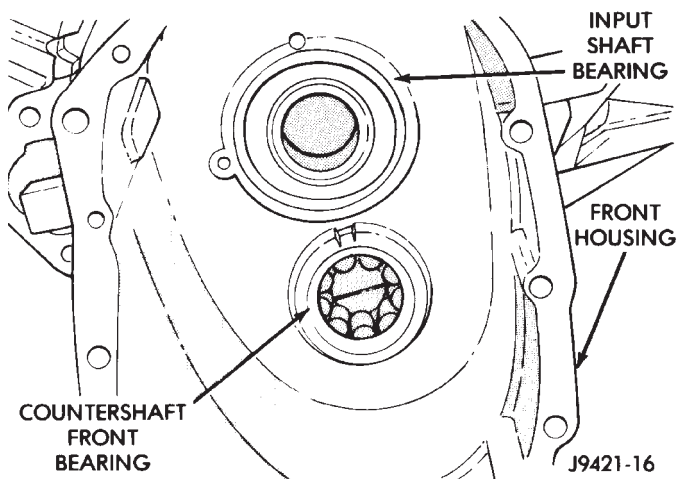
Input Shaft And Countershaft Front Bearing Location
